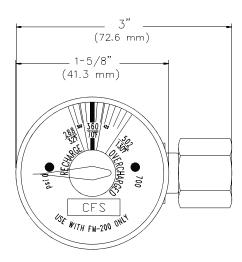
A - Pressure Gauge Assembly Front View - S/N 20240041
